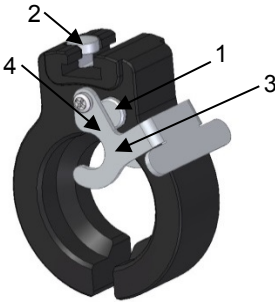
Camera head holder with locking button (1), locking button (2) and clamp (3).
